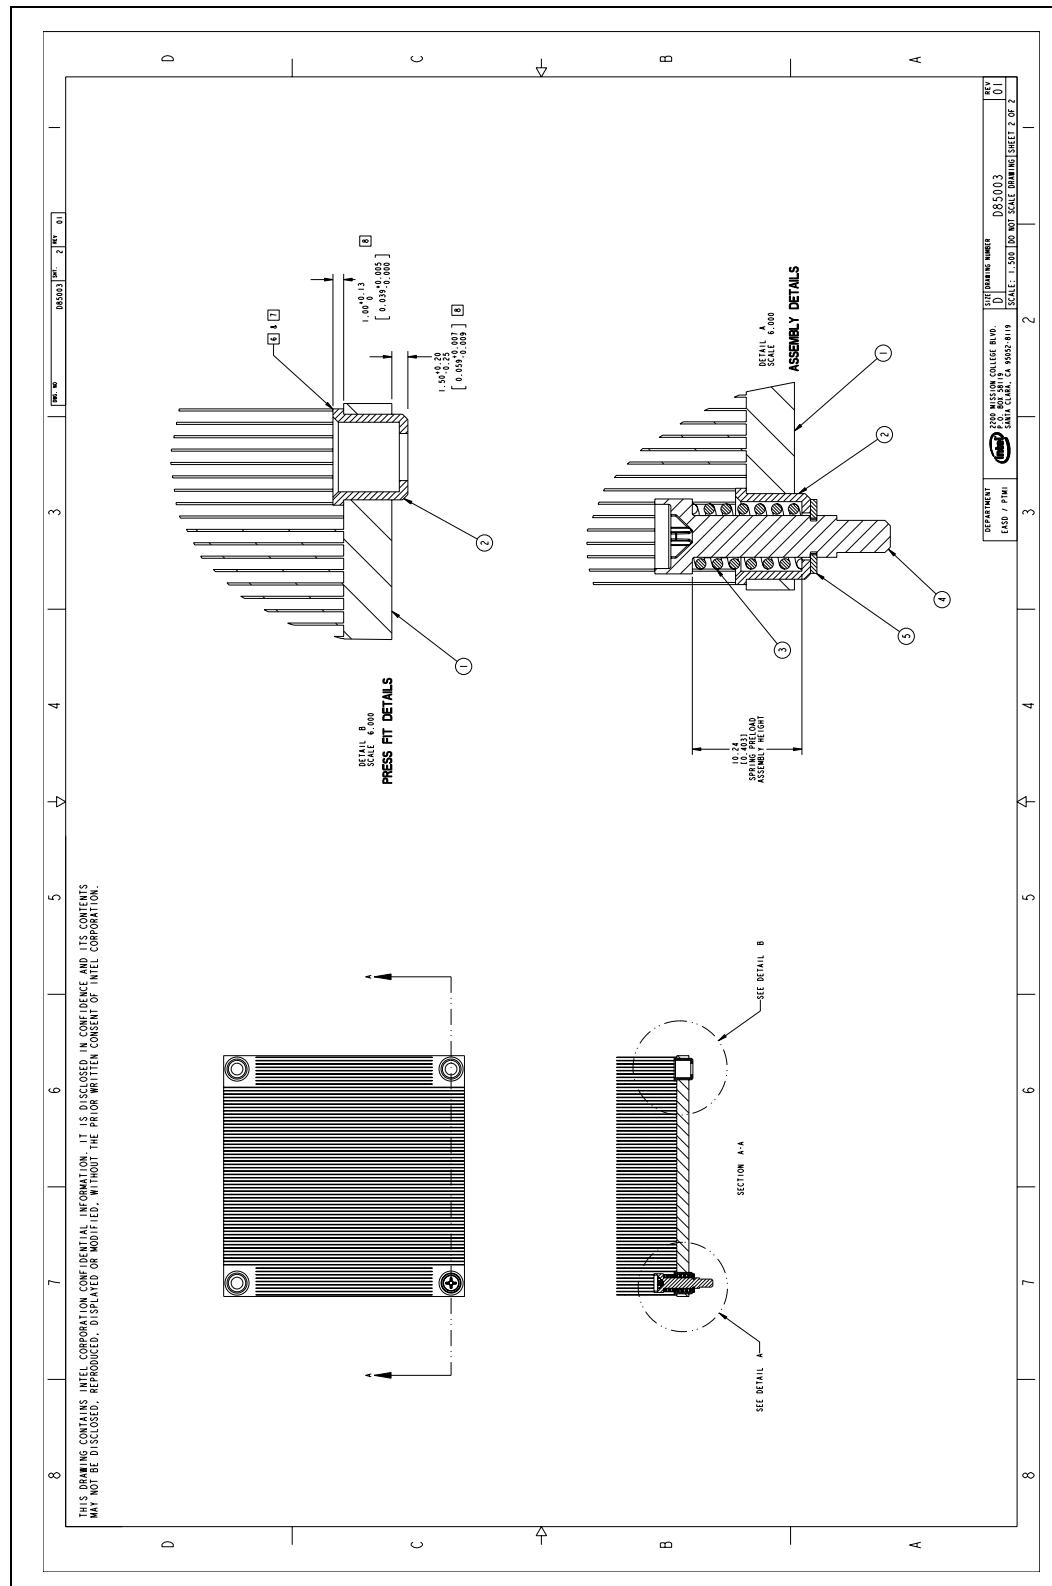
1U Reference Heatsink Fin and Base (Sheet 1 of 2)
